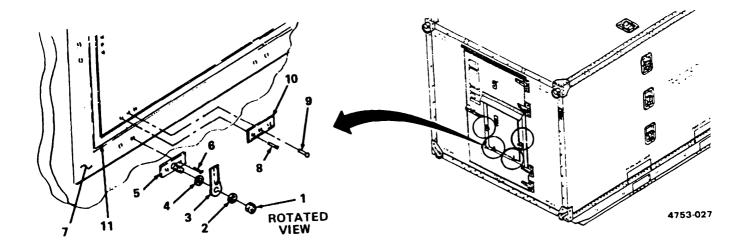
Emergency Exit Latch Strike and Stud Plate Assembly Replacement
